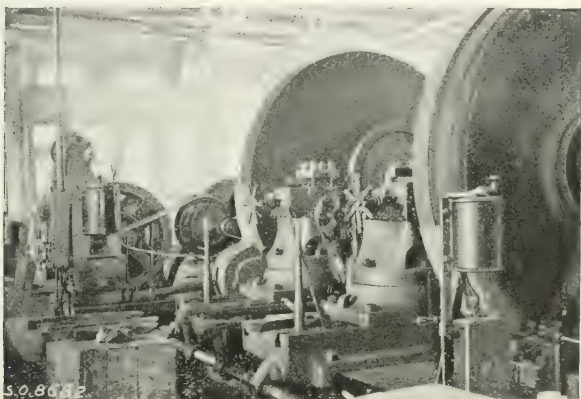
OPERATOR'S POSITION AND CONTROLLERS OF DRIVING-WHEEL LATHE
